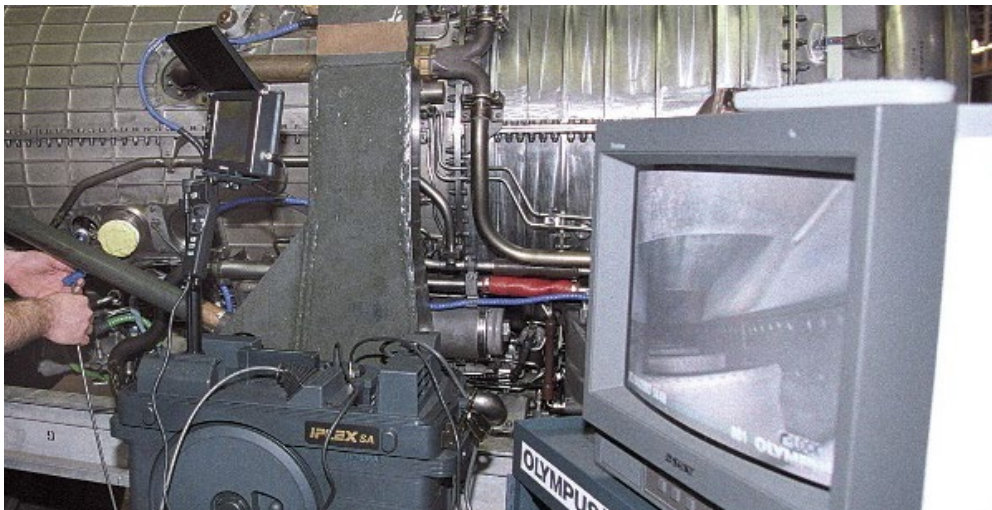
Borescope inspection of an unknown engine type (U.S. Air Force stock photo)
